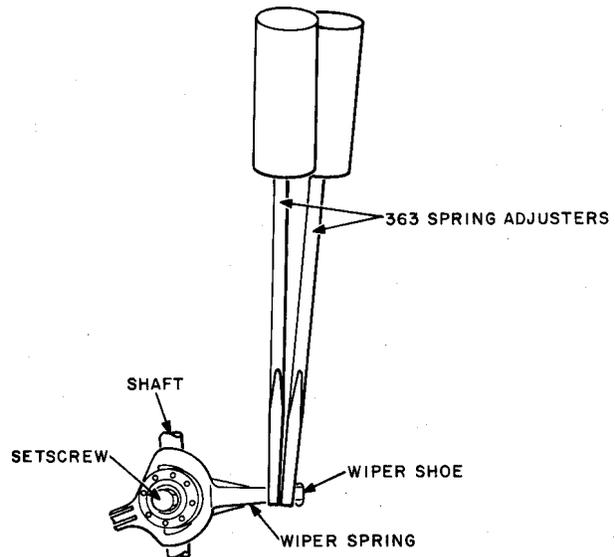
Method of Adjusting Wiper Shoe to Rest Approximately Flat on Commutator Contact
